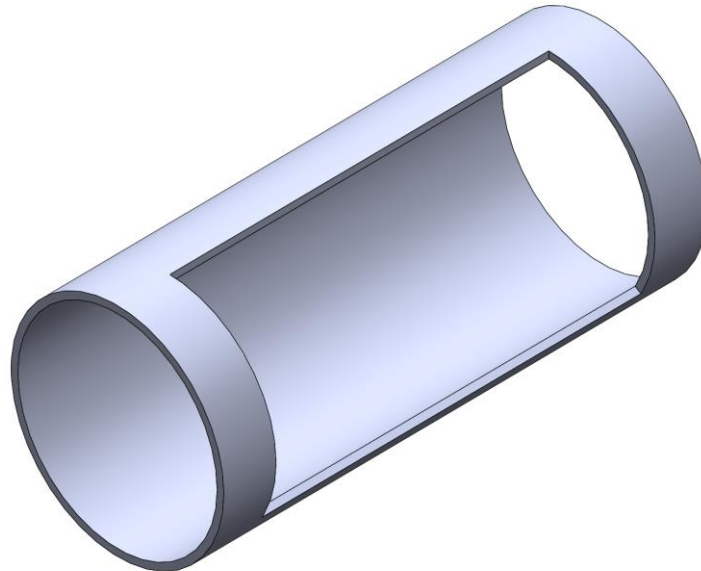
Main cylinder with the cutout for the pin mill housing.
